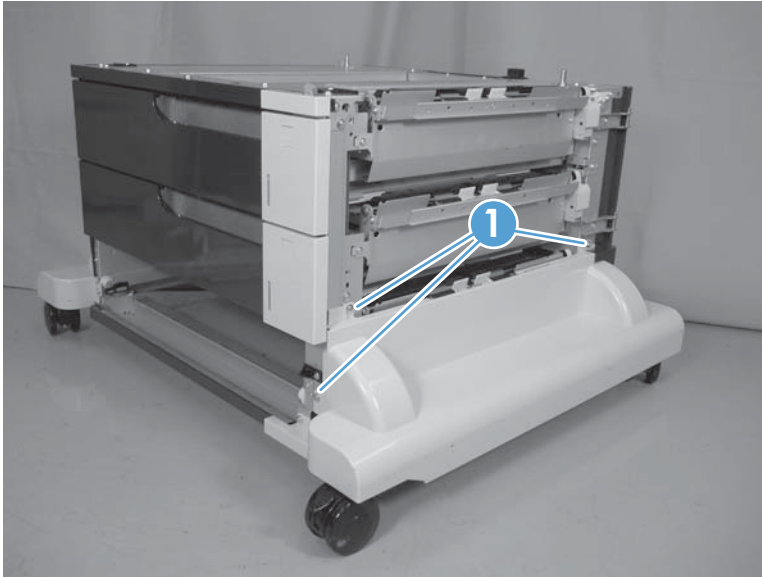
Remove the 3x500 right-door assembly (3 of 3)
